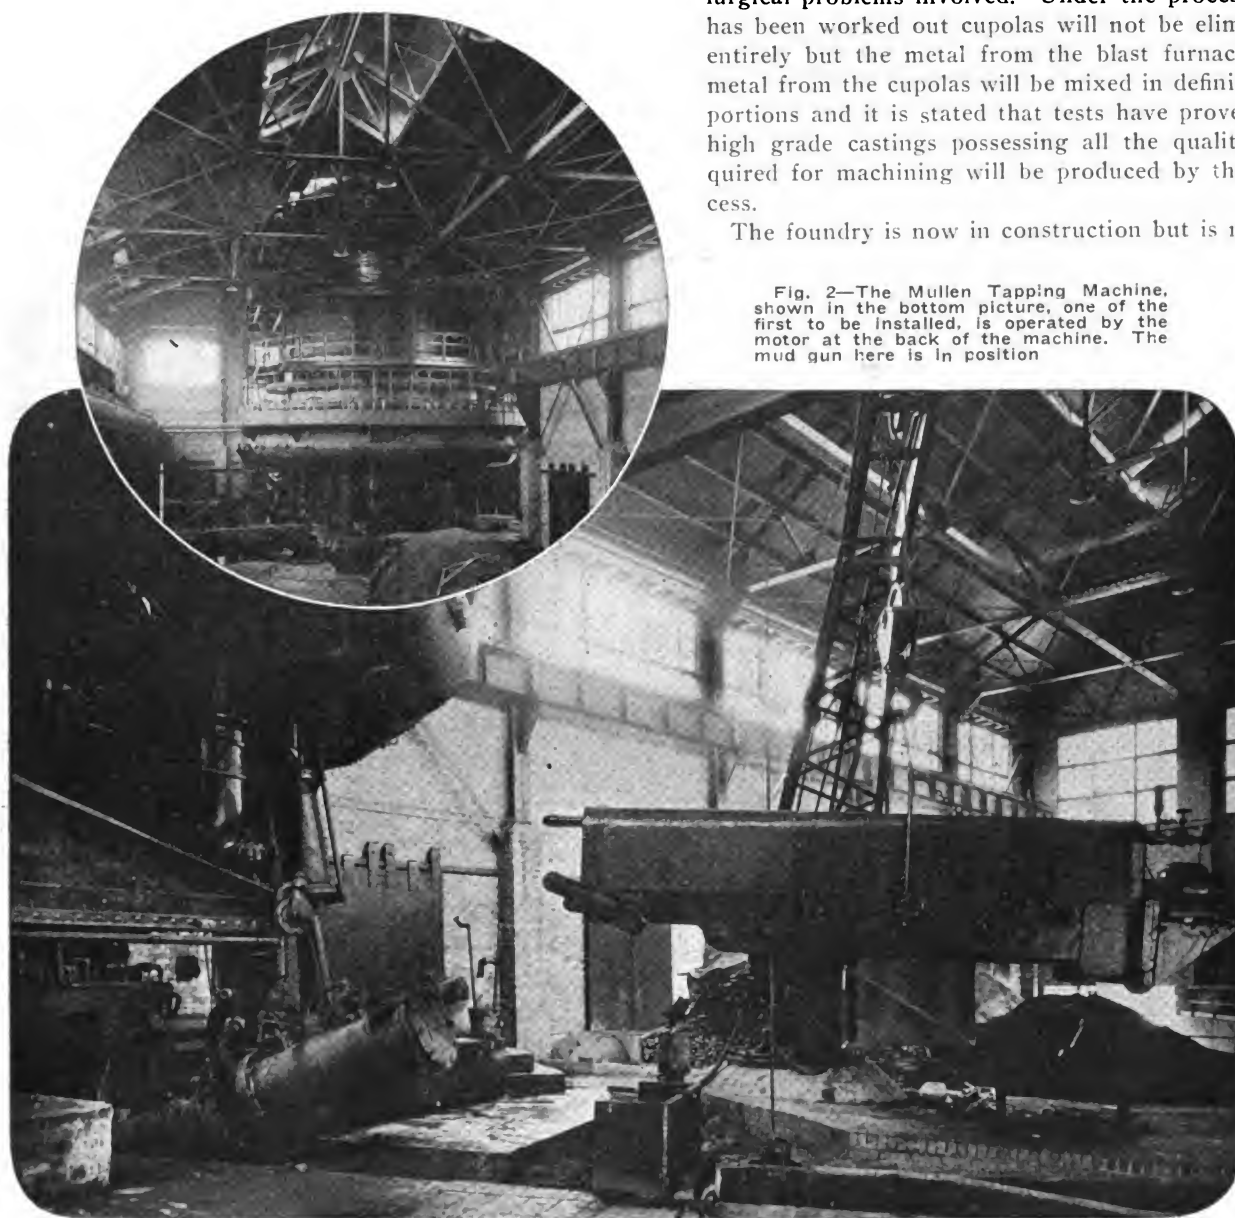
The Mullen Tapping Machine, shown in the bottom picture, one of the first to be installed, is operated by the motor at the back of the machine. The mud gun here is in position
